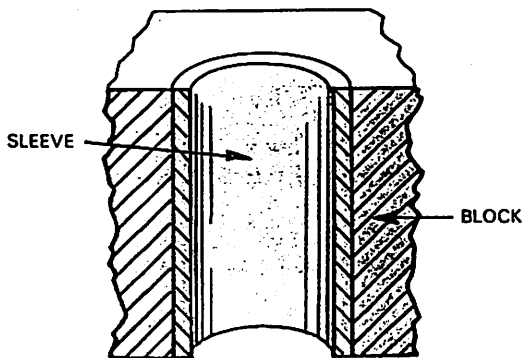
Sleeve held in place by friction between sleeve and block.
